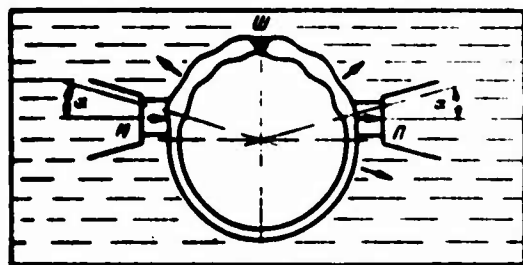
Diagram of control of welded pipes for defects in the welded seam using normal waves [149]: Π - radiator; Π - receiver; \equiv - seam.
